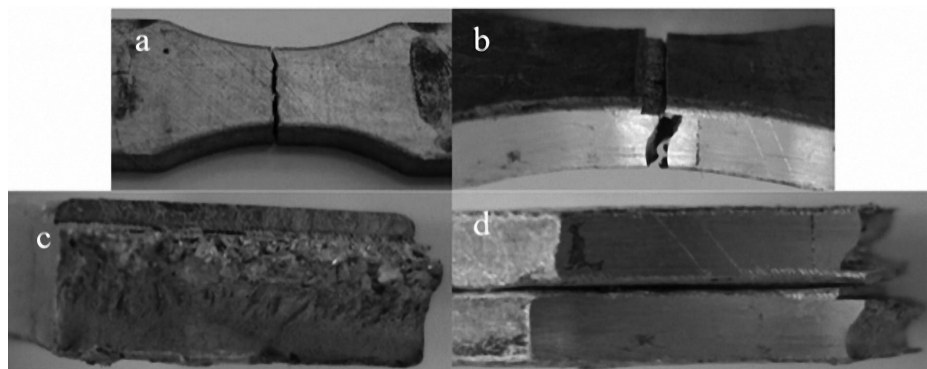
Images of the fracture samples a) base material, b) welded material, c and d) broken surface
